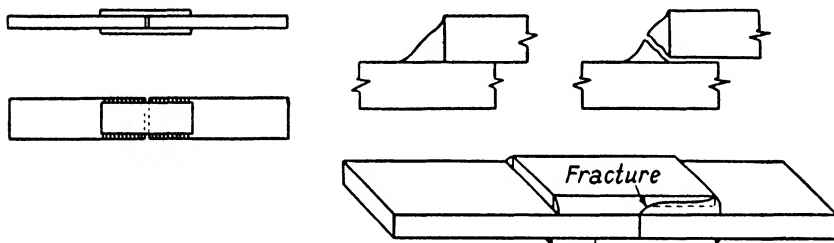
POSITION OF FRACTURE IN SIDE FILLET WELDS
